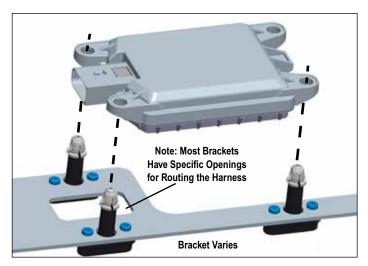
RADAR SENSOR INSTALLATION (EXPLODED VIEW)
